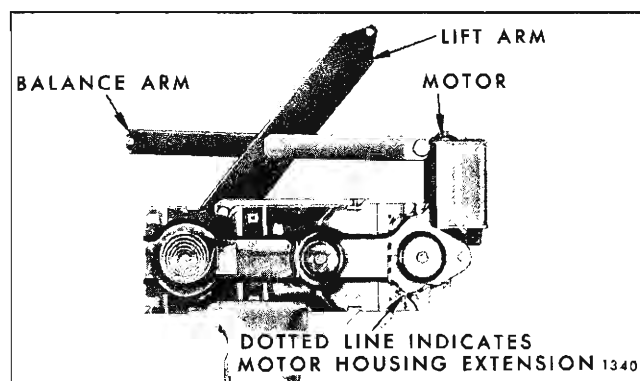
D31—Door Window Regulator and Electric Motor Assembly
